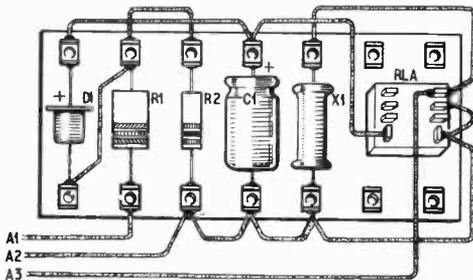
Tag board assembly and wiring details for the Lamp Protector
